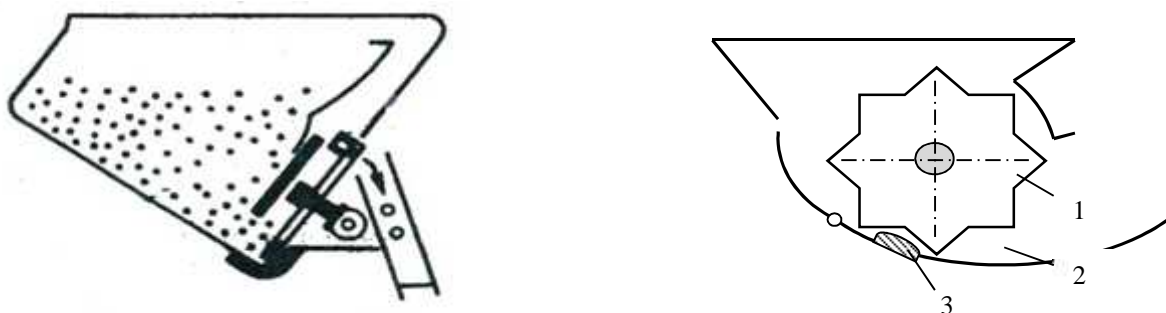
Parts of a sower- a) seed box; b) dispensing devices; box of adjustable position 2, 3 volumes of distributed to a rotating see
